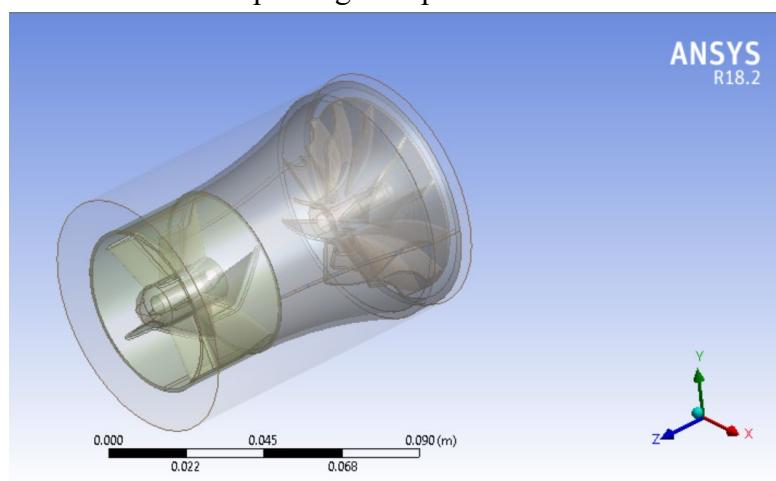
Assembly of Inlet Guide Vanes and Turbo-Charger Compressor GT28
